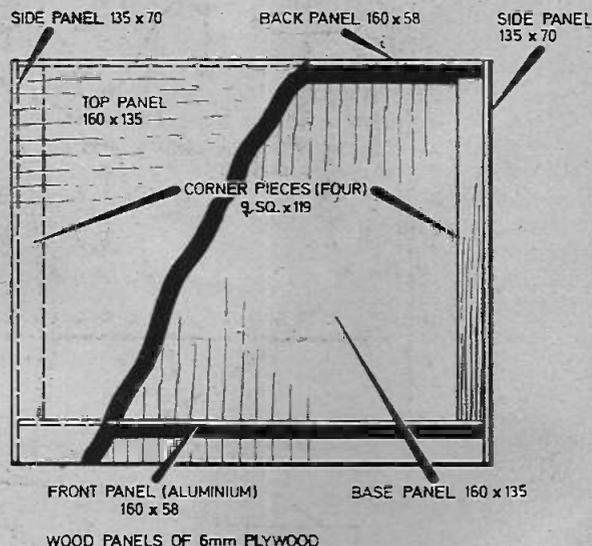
Construction and dimensions of the prototype case for the tuner.
